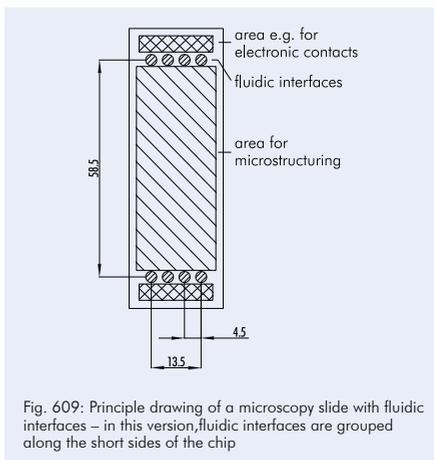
Principle drawing of a microscopy slide with fluidic interfaces – in this version, fluidic interfaces are grouped along the short sides of the chip
